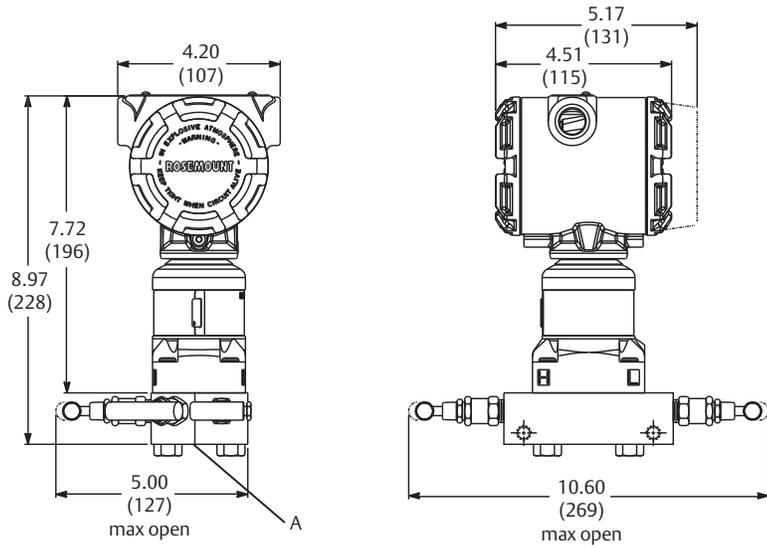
Rosemount 305RC 3-Valve Coplanar Style Manifolds
